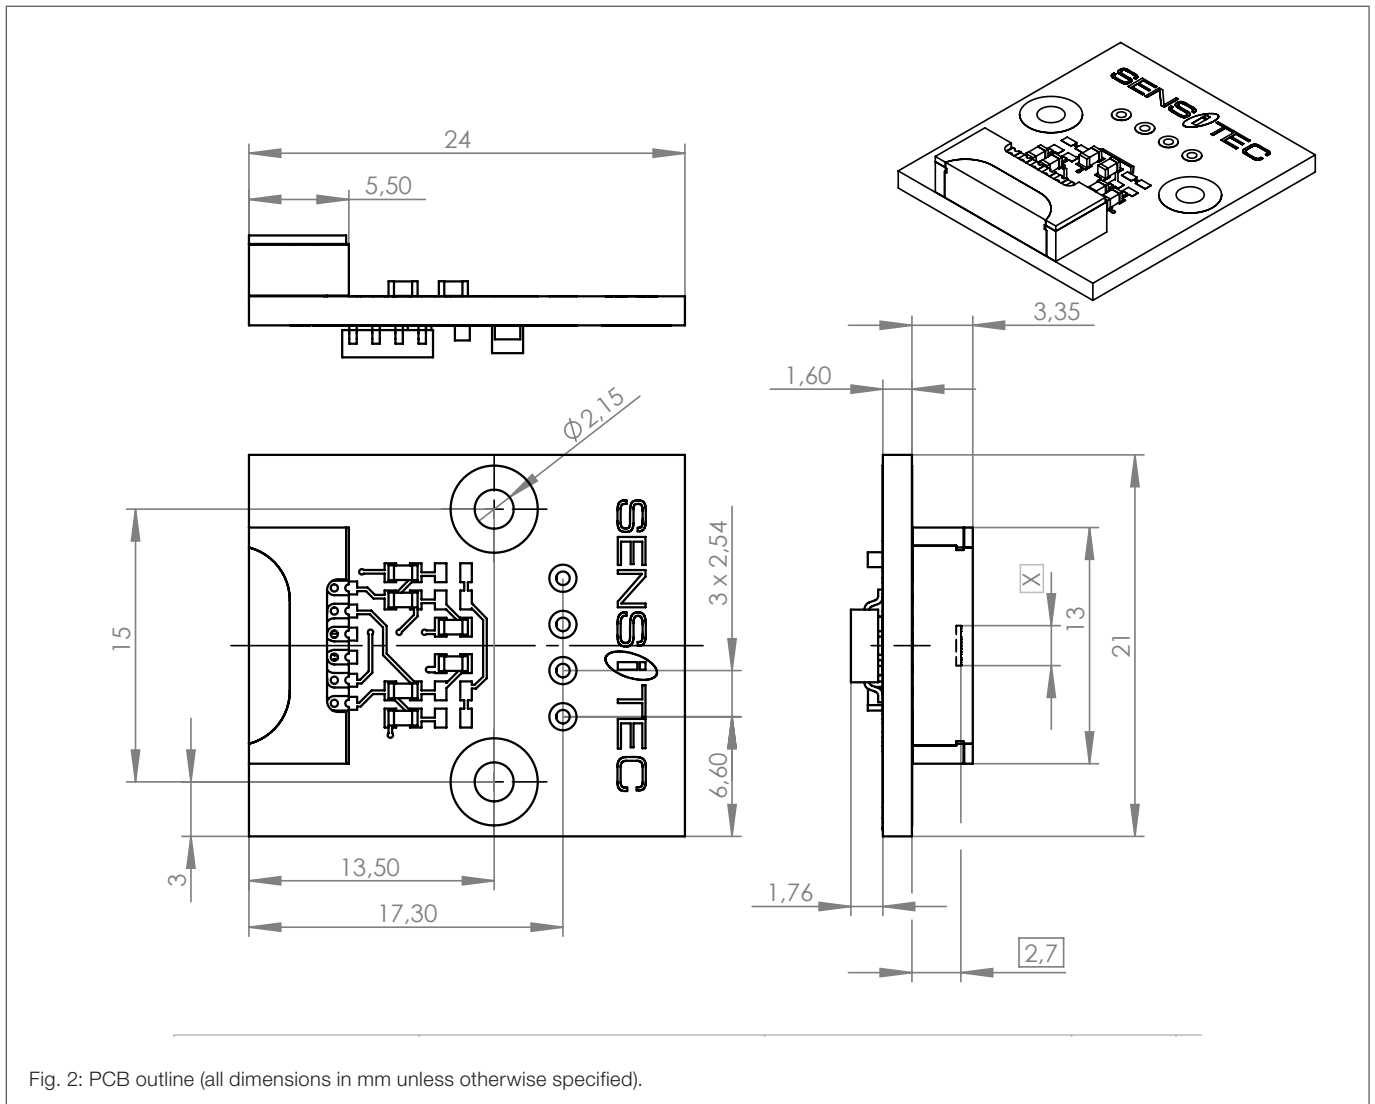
PCB outline (all dimensions in mm unless otherwise specified).
